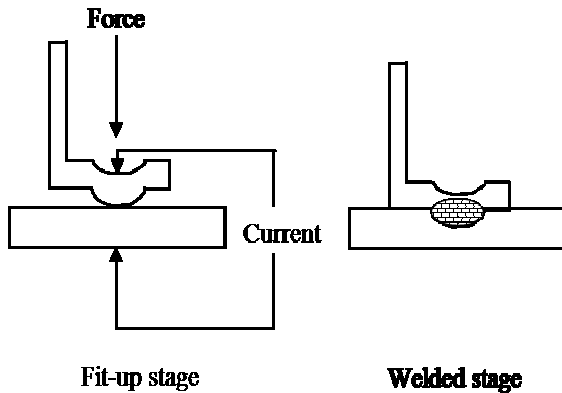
Schematic of projection welding before and after welding is shown. It illustrates the creation of the weld (pool) at the particular projection.
